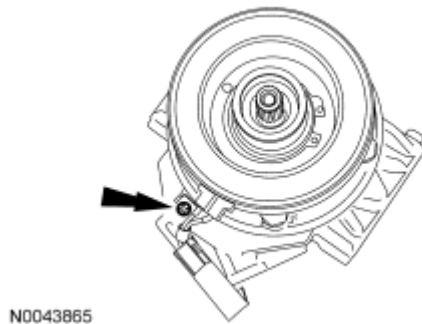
Locating A/C Clutch Field Coil Electrical Connector Clip Screw
